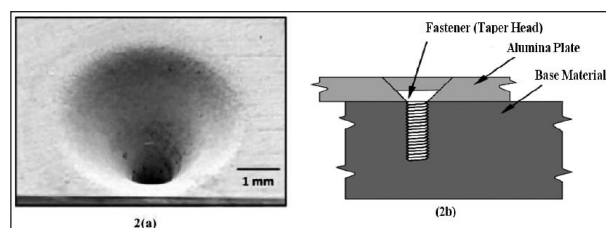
(a) A hole machined on a 4 mm thick alumina A99 workpiece by using SiC abrasive jet (b) possible application of drilled alumina flat.
